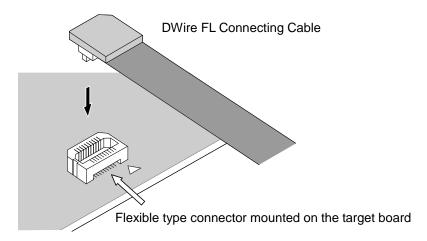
Connecting DWire FL Connecting Cable to Target Board
